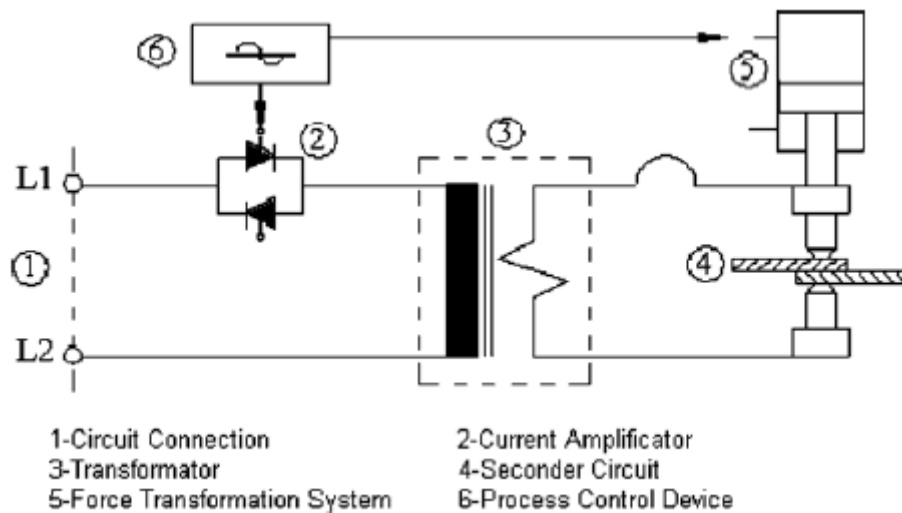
Schematic illustration of the ERW welding machine (21)
